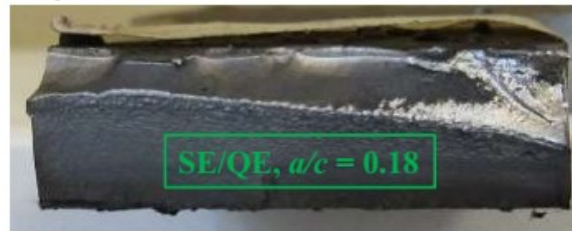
Fracture surfaces for as-welded A514 steel specimens under CA-UL loading
